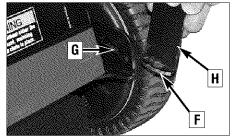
Assembling handlebar. (Rightside handlebar strut shown.)
